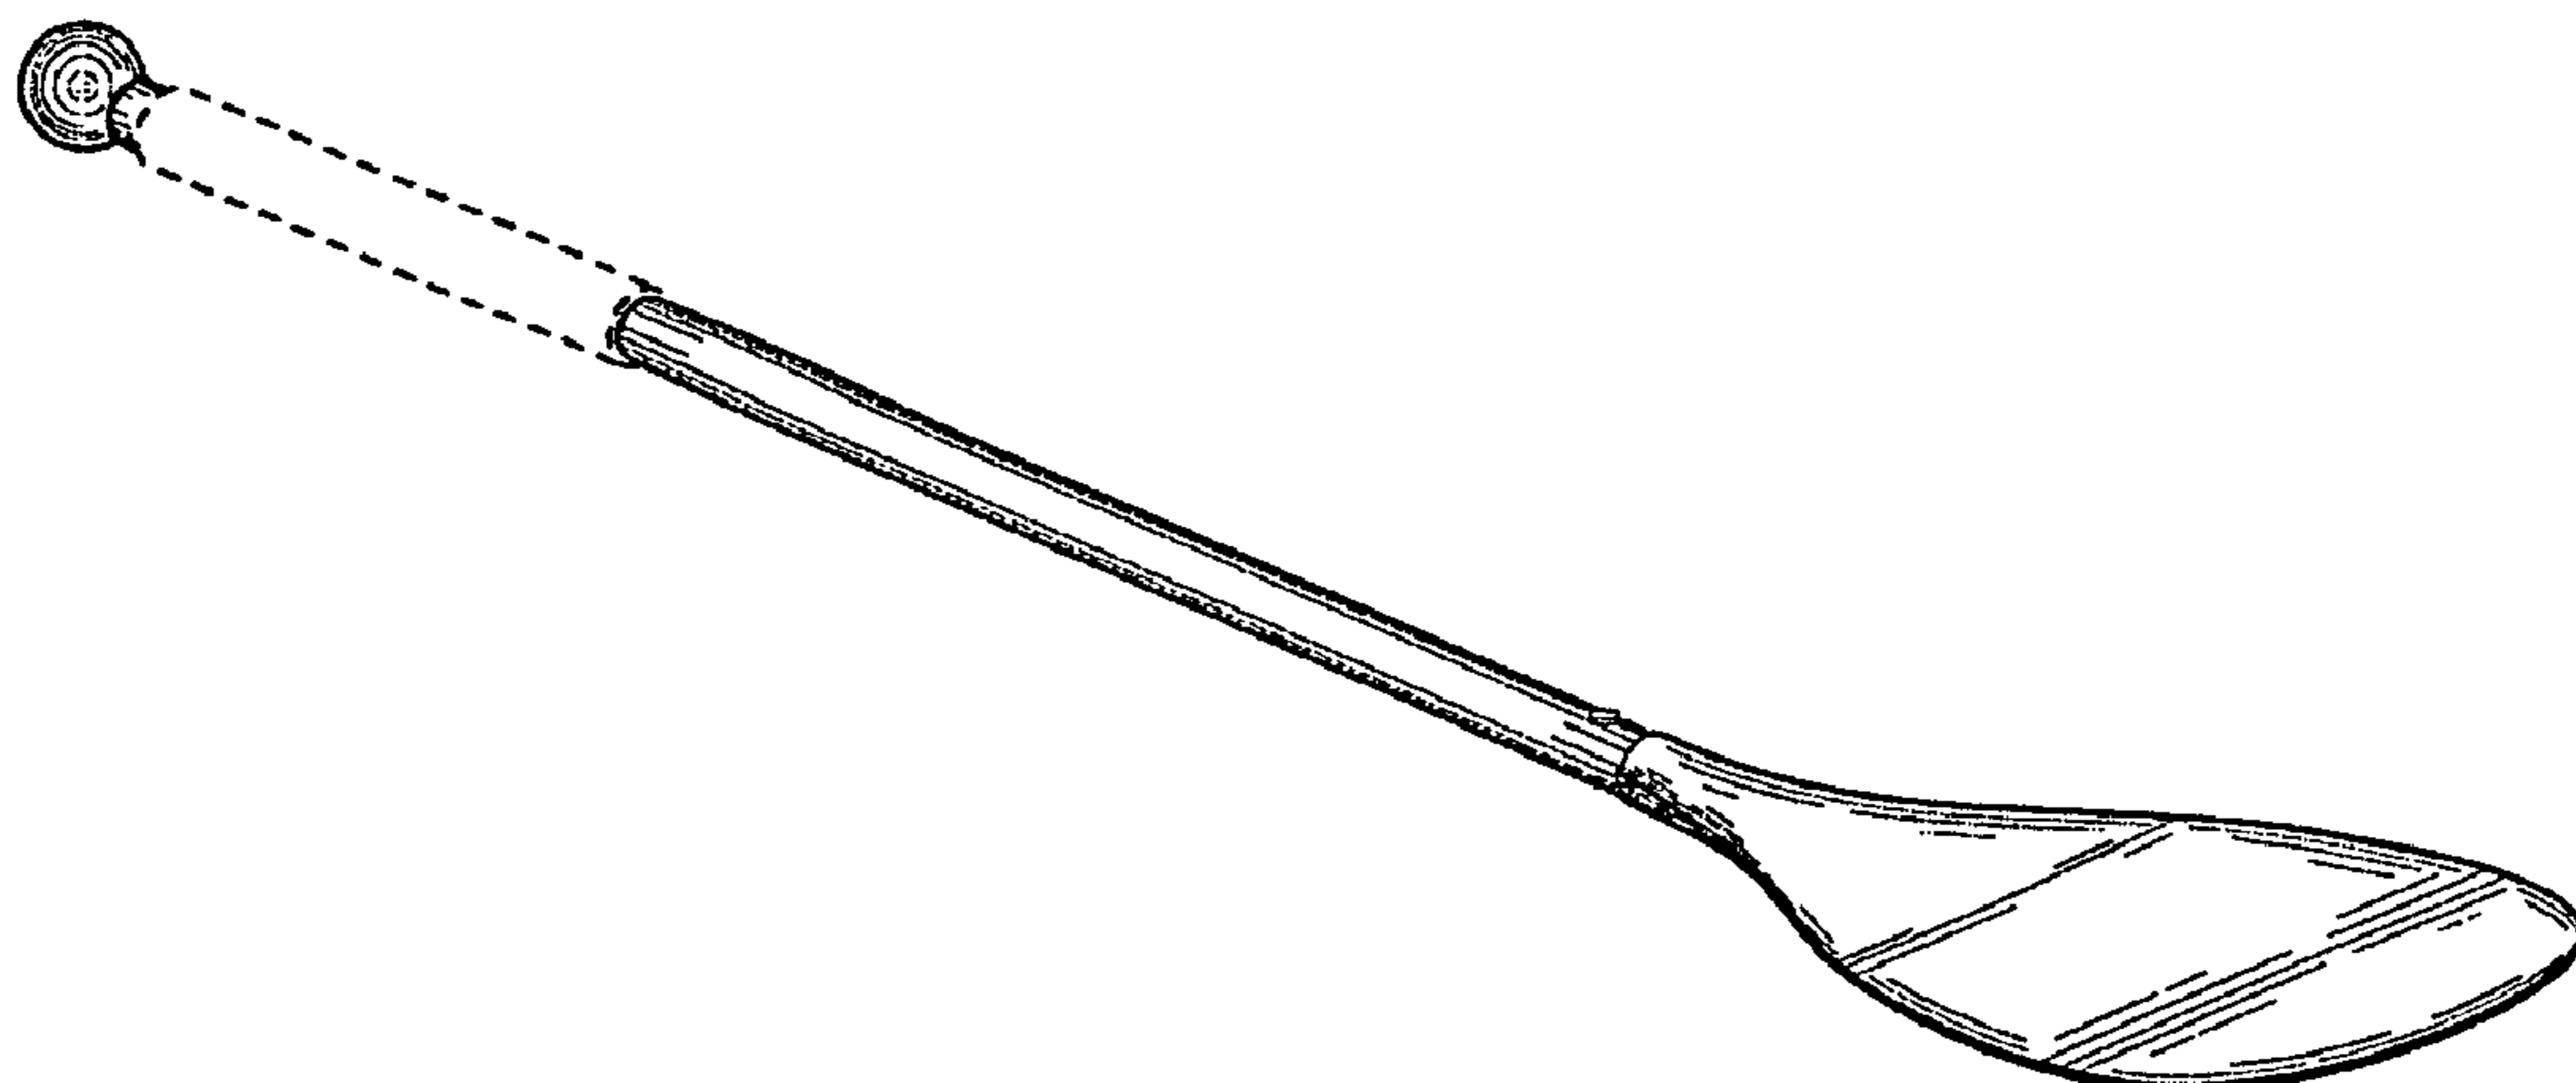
is an enlarged front view of the paddle design shown in FIG. 1, with a long section of the handle omitted where indicated by sectional cutoff lines;
